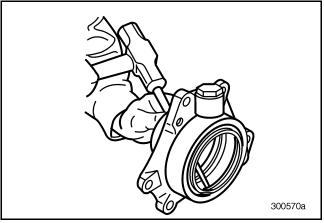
Using Hammer and Blunt Punch to Remove Oil Seal
